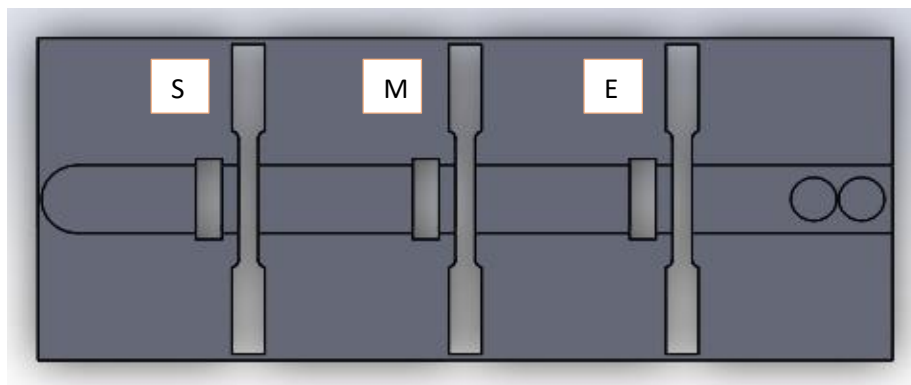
A friction stir-processed plate sample cut perpendicular to the joint.
